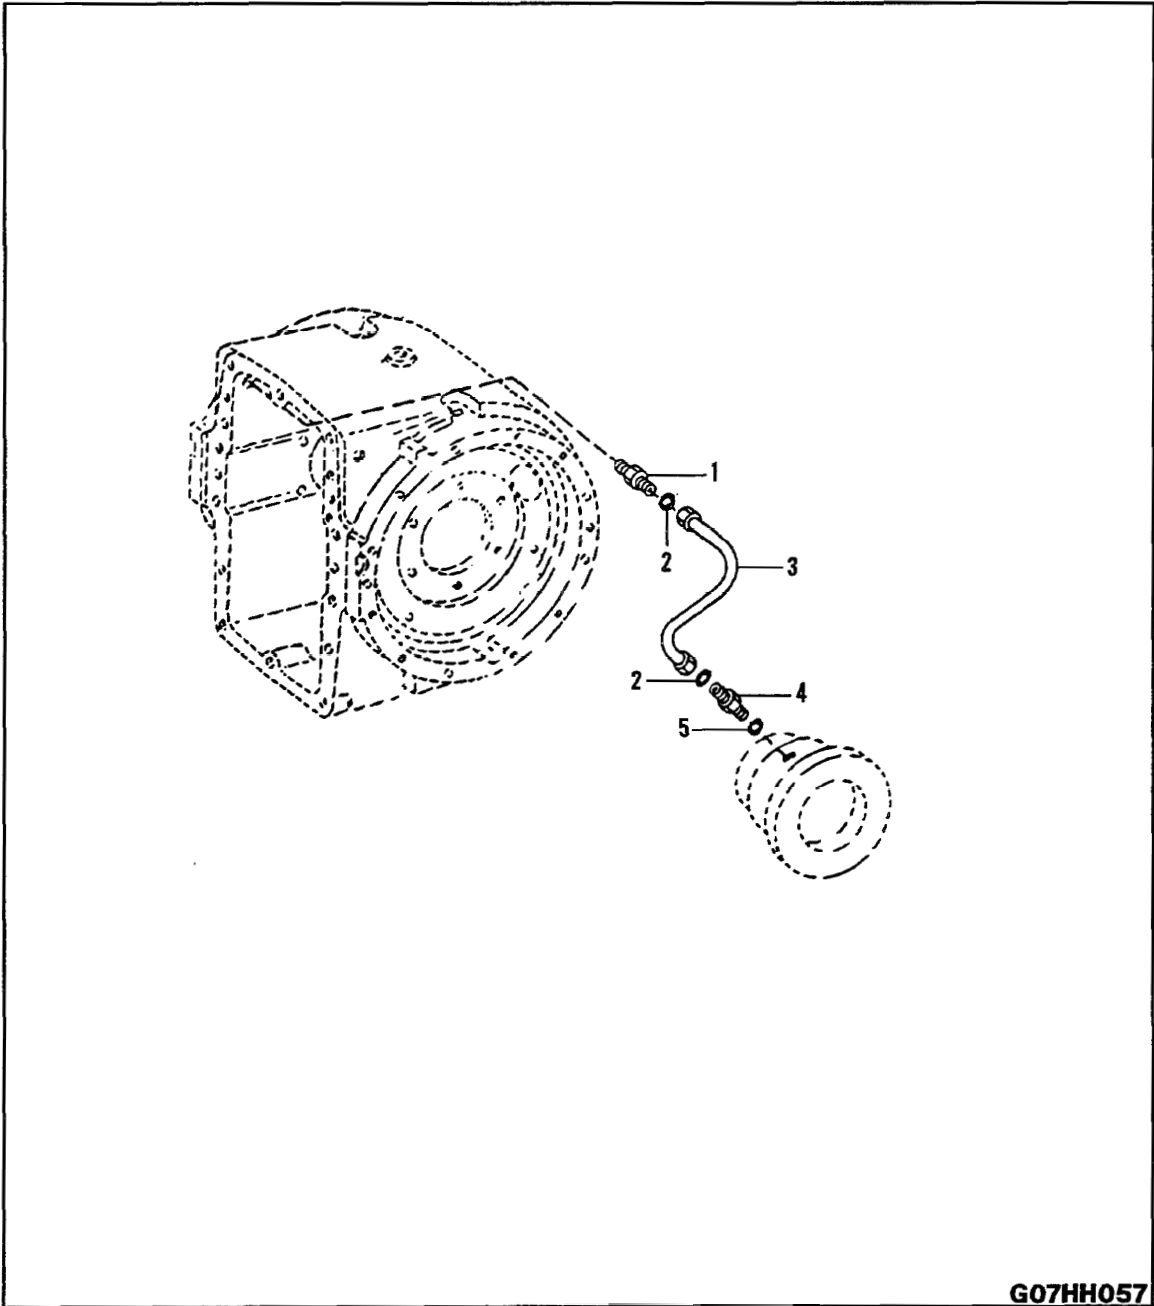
EXPLODED VIEW OF LOCK/UNLOCK DIFFERENTIAL CASE OIL LINE
